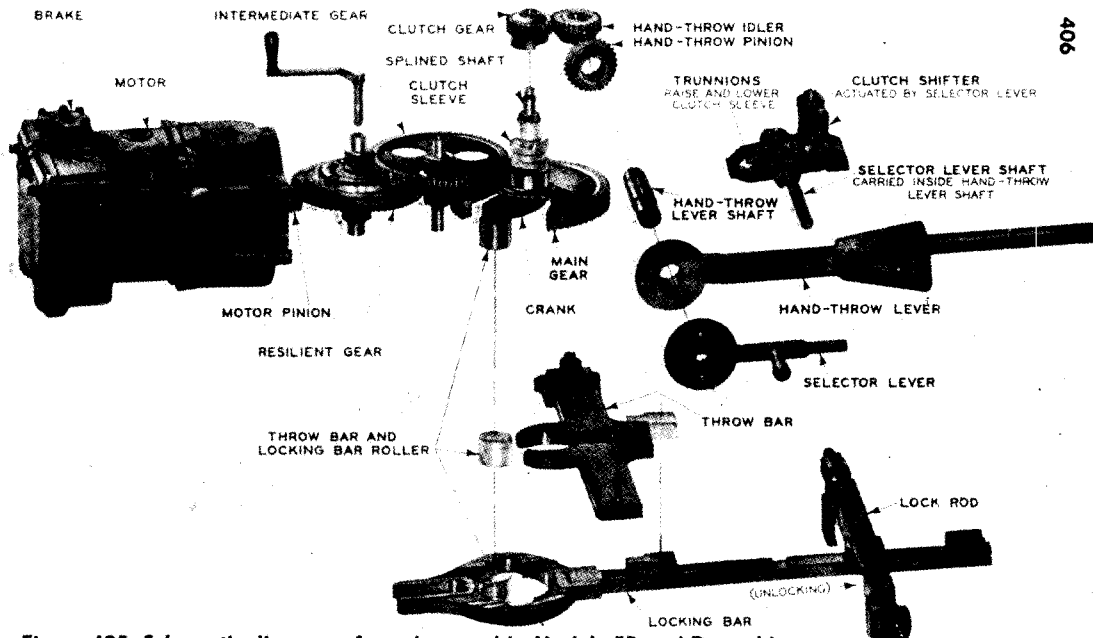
Schematic diagram of gearing used in Models 5B and D machines.
